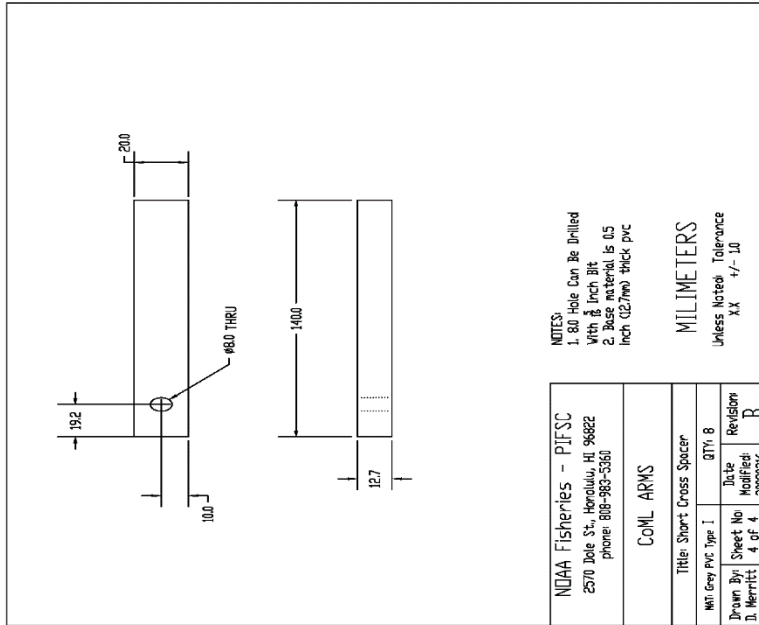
Technical drawing for manufacture of PVC short cross spacers
